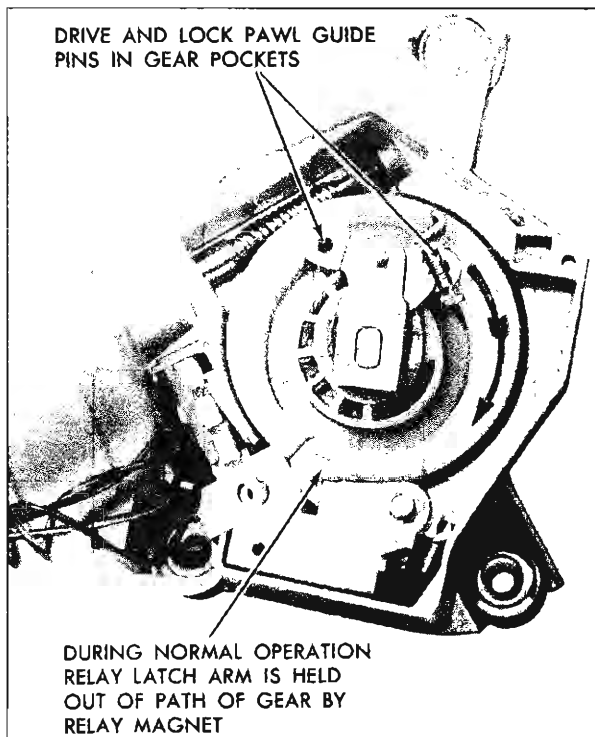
Drive and Lock Pawl Guide Pins in Pockets
